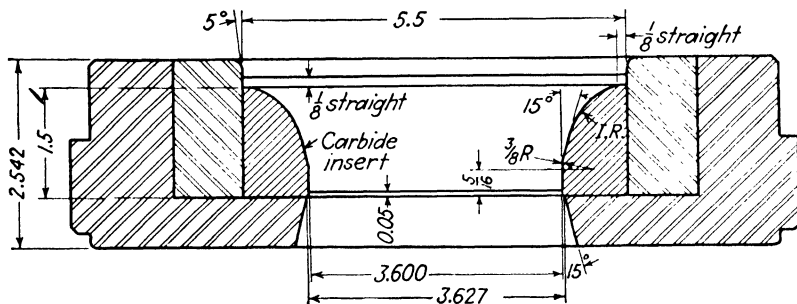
A sectional view through the cupping die showing the carbide insert that takes the maximum abrasion when drawing shells.
